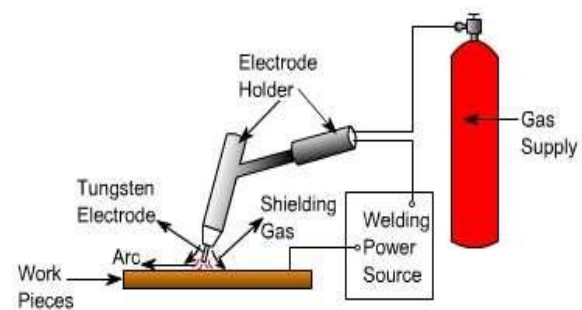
Schematic diagram of TIG welding and mechanism of TIG welding
